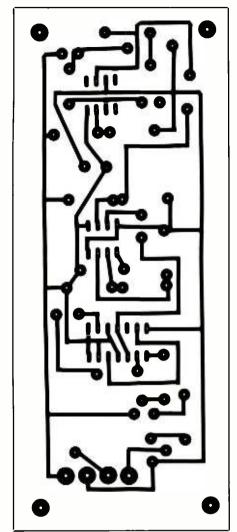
Actual-size etching-anddrilling guide for the pc board.
